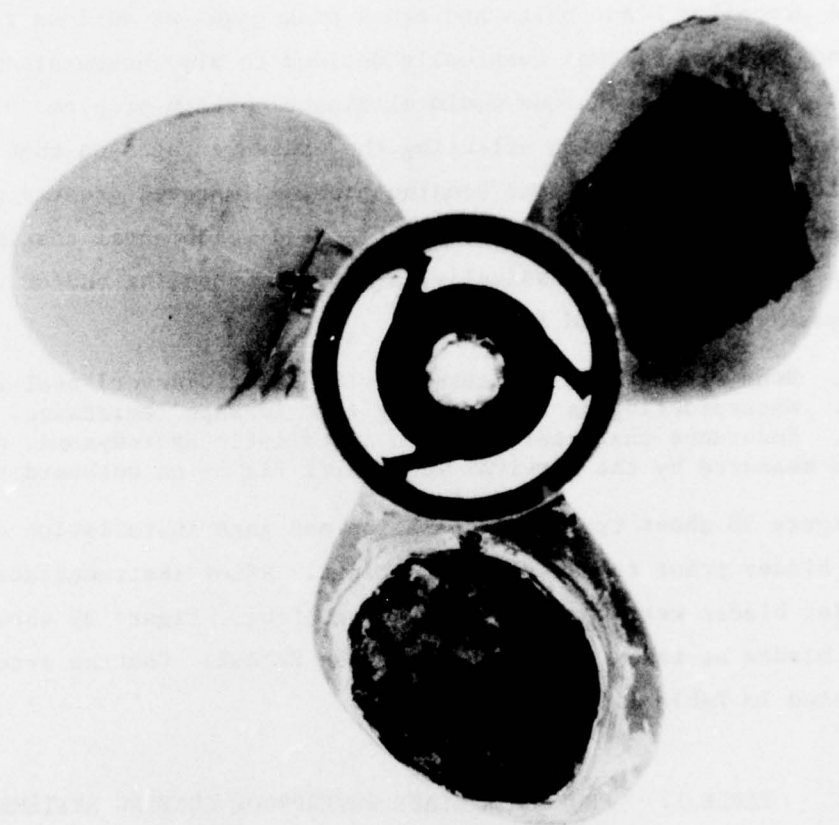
Typical Test Coatings on Outboard Motor Propeller Blade
